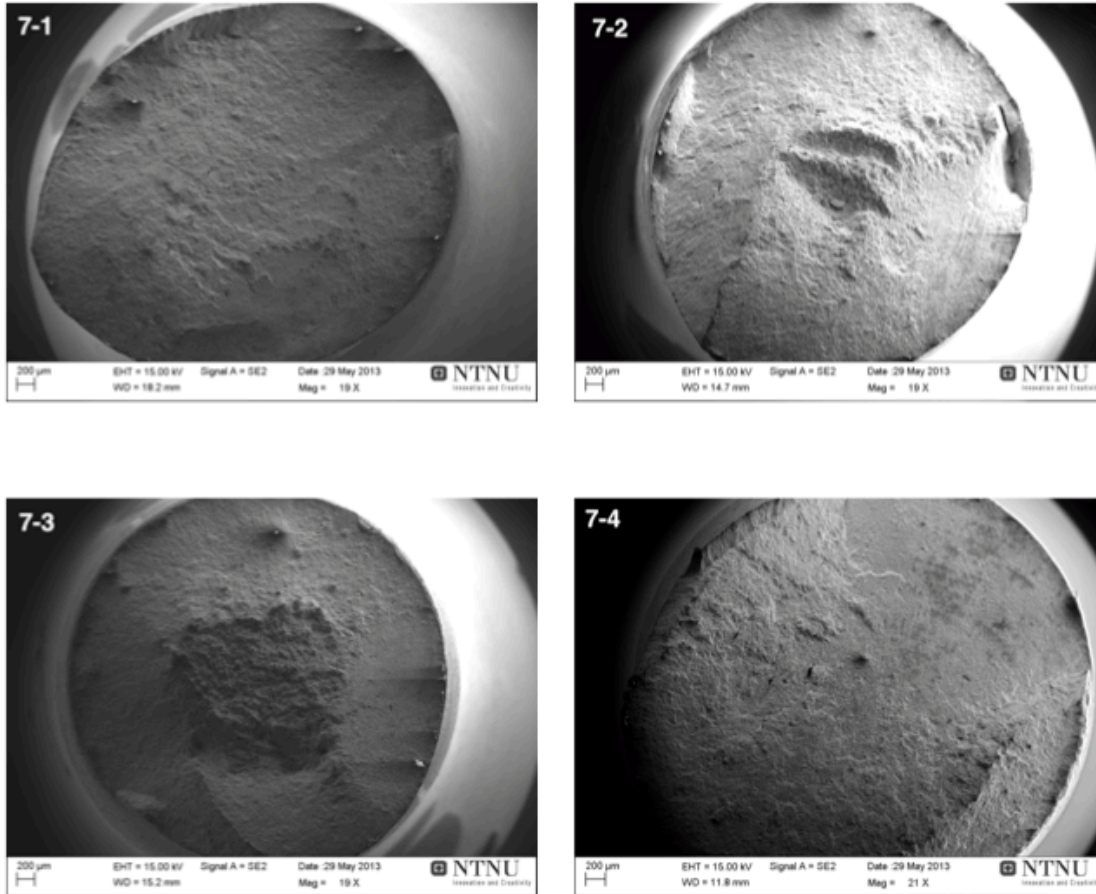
Fractographs of the fracture surfaces of the Al-7.5wt% AZ31 tensile test parallel.
